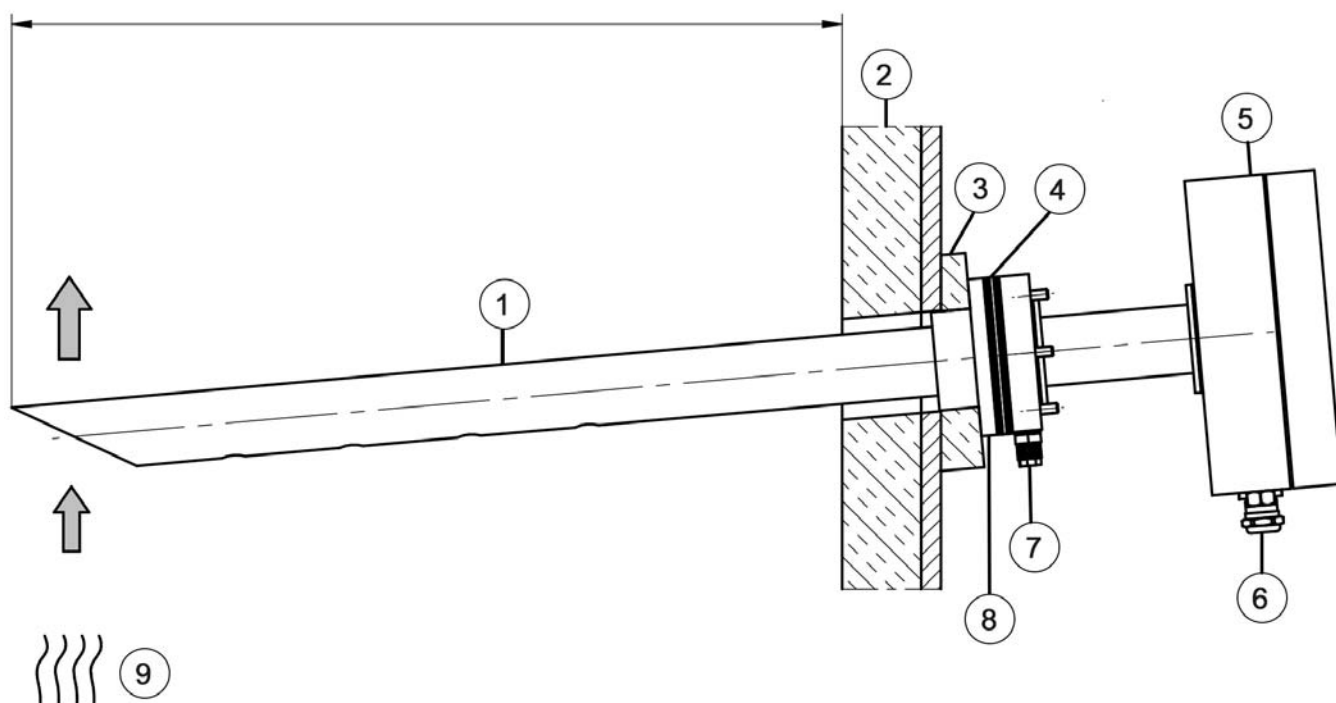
Dimensional drawing Combination Probe KS2D_{NOx} with gas extraction device (GED)
